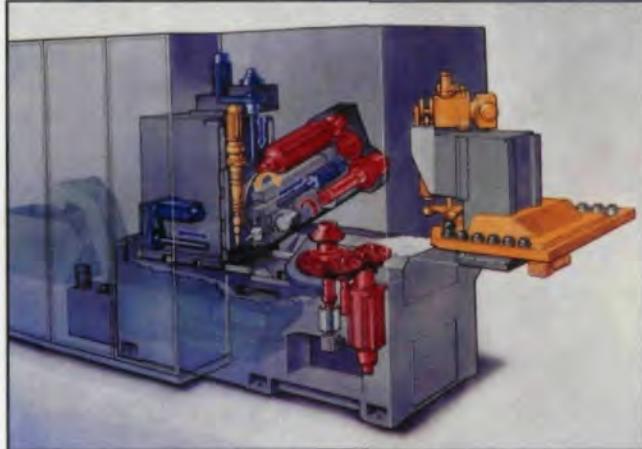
Concept hobbing machine for dry hobbing. Courtesy of Liebherr America. Used with permission.
